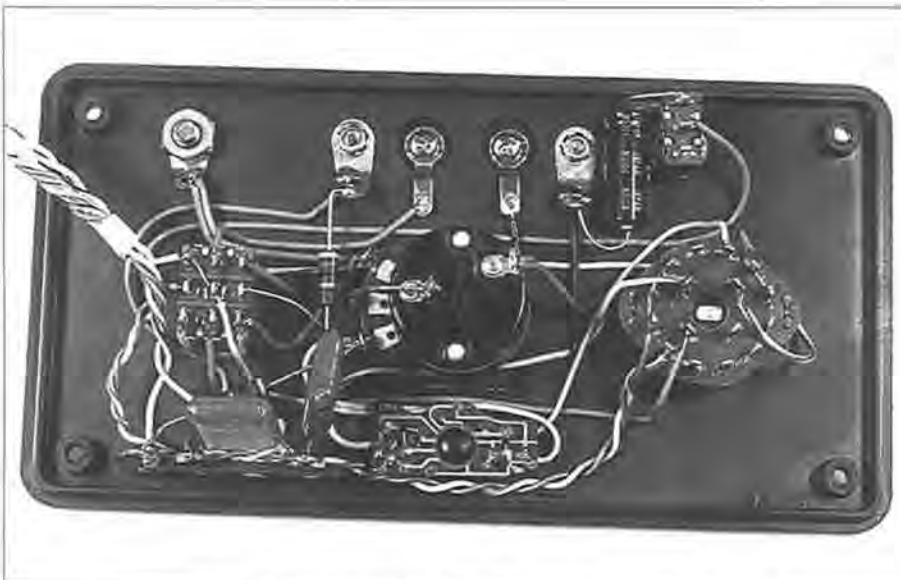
A close-up of the top panel. Note the 3-lug terminal strip at the lower left used as tie points for C_1 , C_2 , and R_2 . Also, note the single solder lug held by the right-hand terminal post mounting screw for use as a tie point for the negative lead of C_3 .
